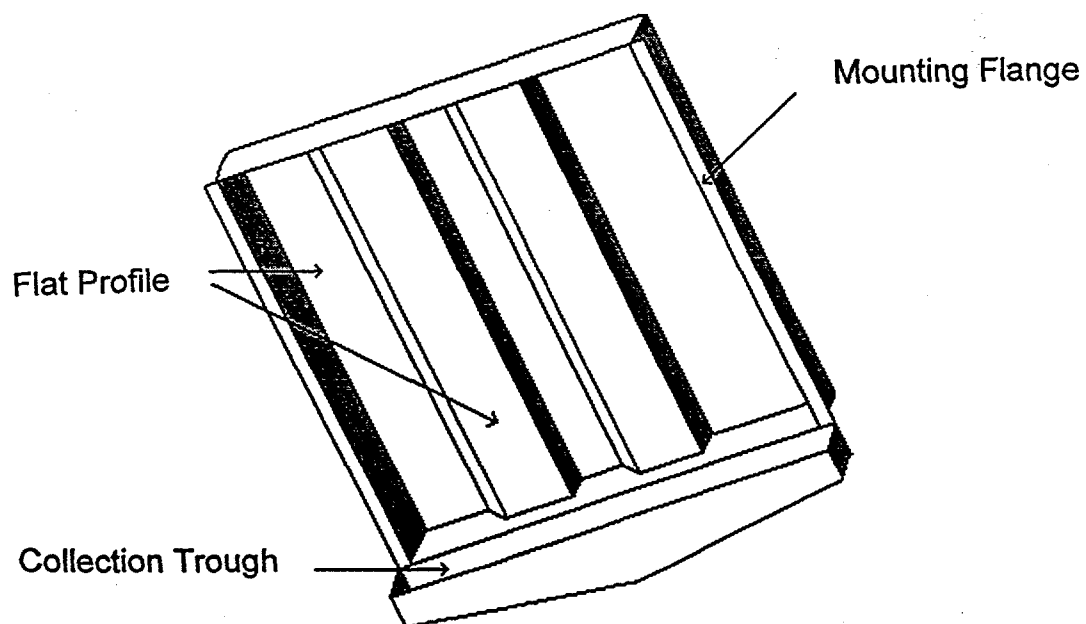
PERSPECTIVE DRAWING OF PILOT-SCALE HEAT EXCHANGER PANEL WITH COMMERCIALY AVAILABLE ALUMINIZED SHEET METAL.
